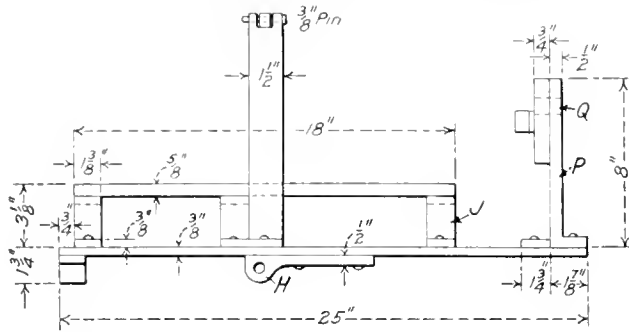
Frame for Holding Crosshead Shoe and Mold.
